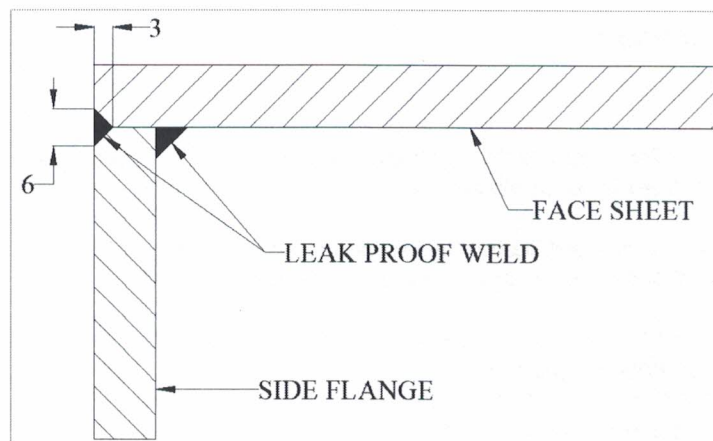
Typical leak proof welds between Faceplate and Flange plate
